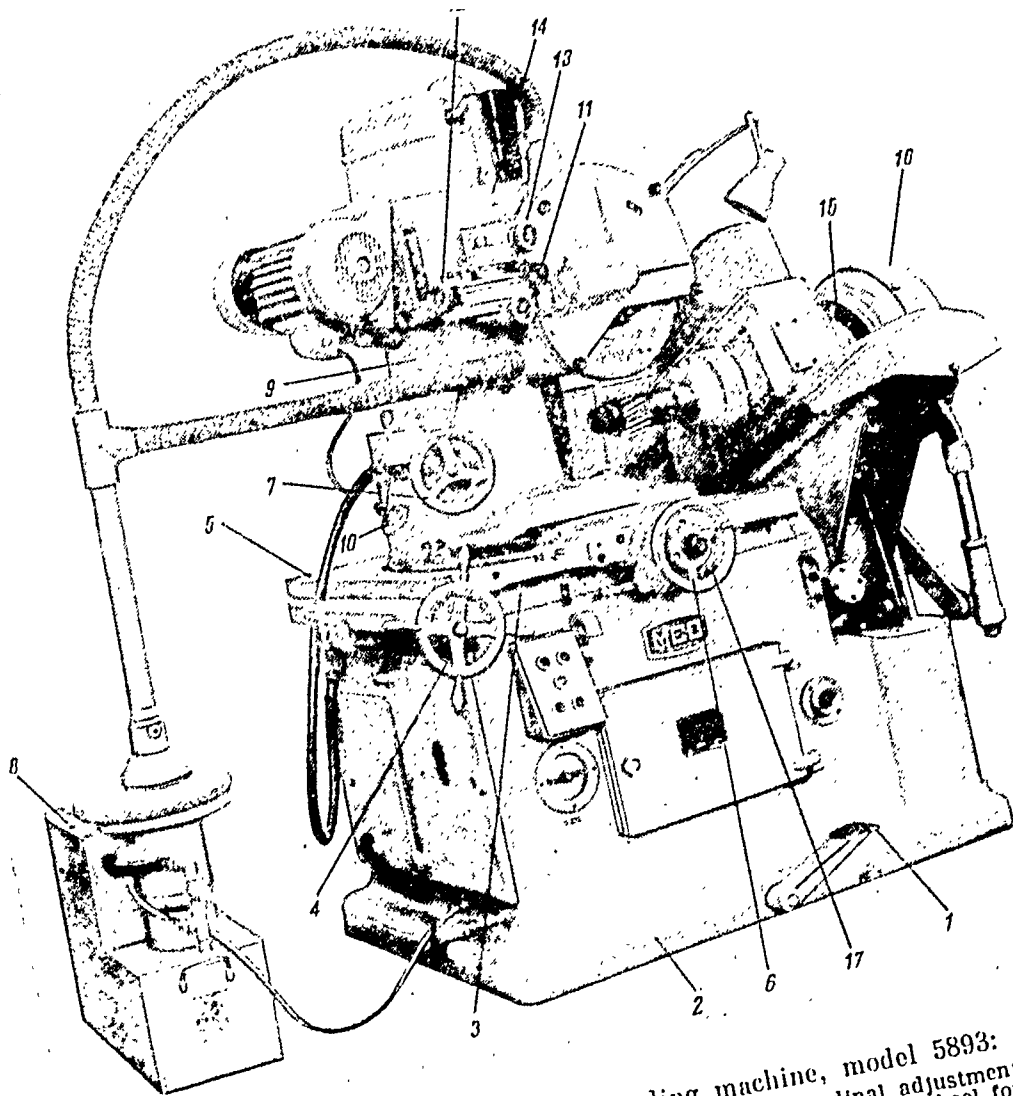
Semiautomatic gear-grinding machine, model 5893:
